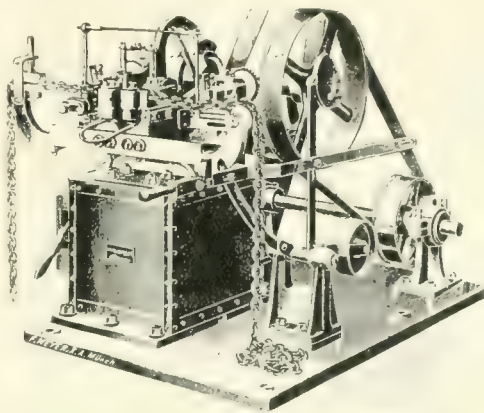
ELECTRIC WELDING MACHINE.
